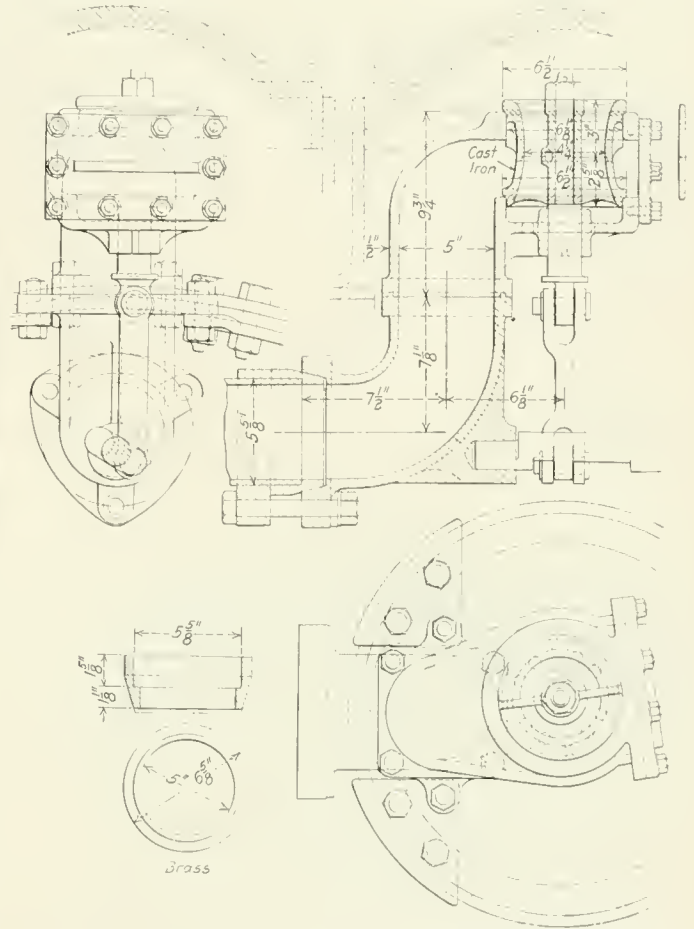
Lockyer Throttle Valve for North Eastern Locomotives
